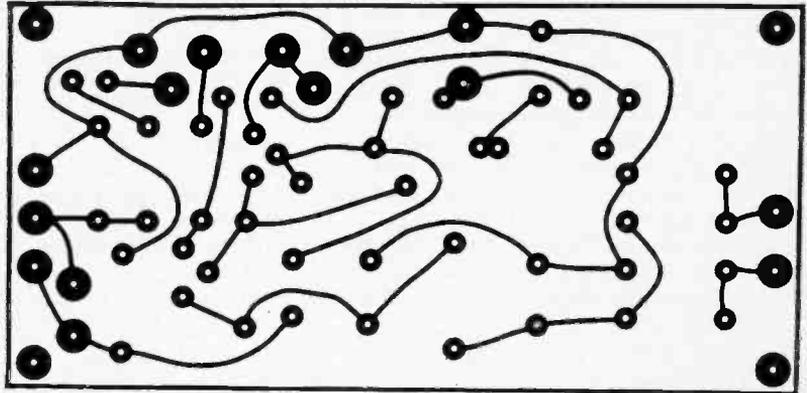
Actual-size foil pattern can be used to make your own circuit board.
